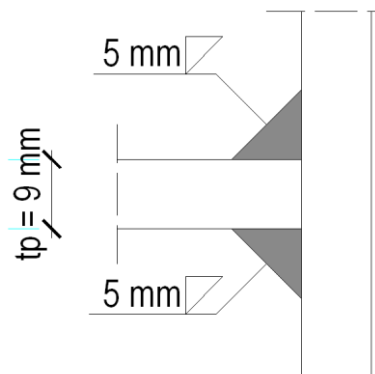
Weld dimensions of the plate connector.
